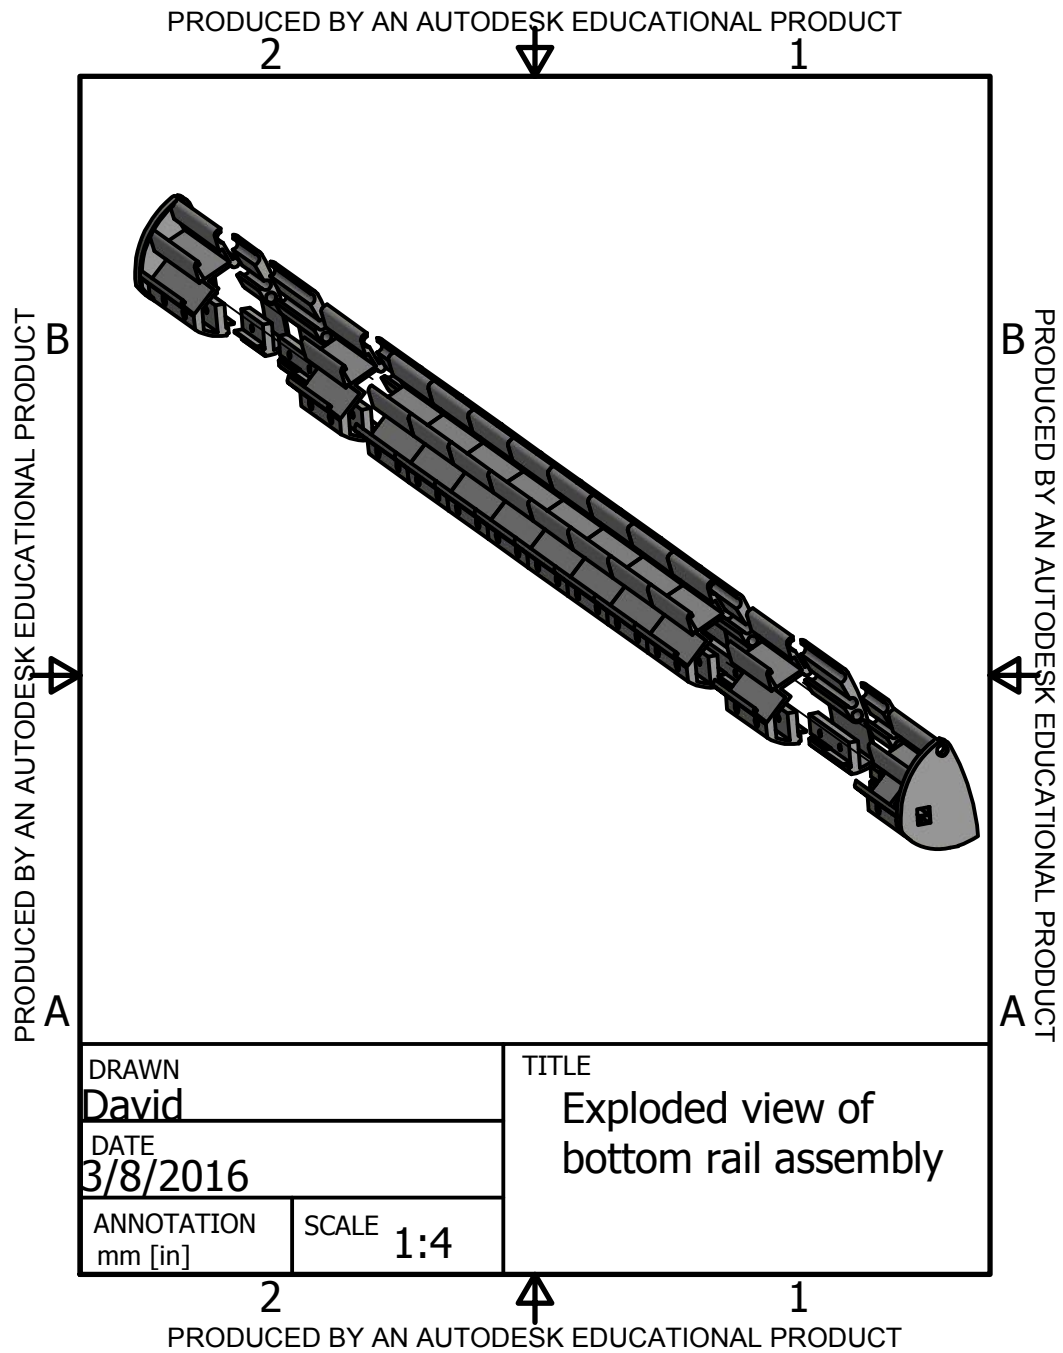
Exploded view of the 3D printed bottom rail. This assembly is fastened with 1.25" 6-32 screws inserted in the front side and into a captive nut on the backside.
